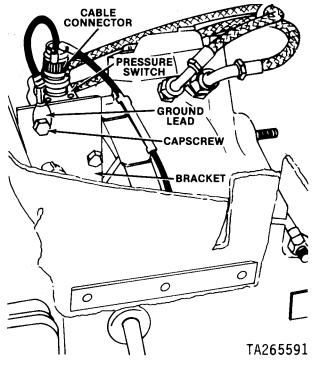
Removing or Installing Smoke and Dust Detector Cables
